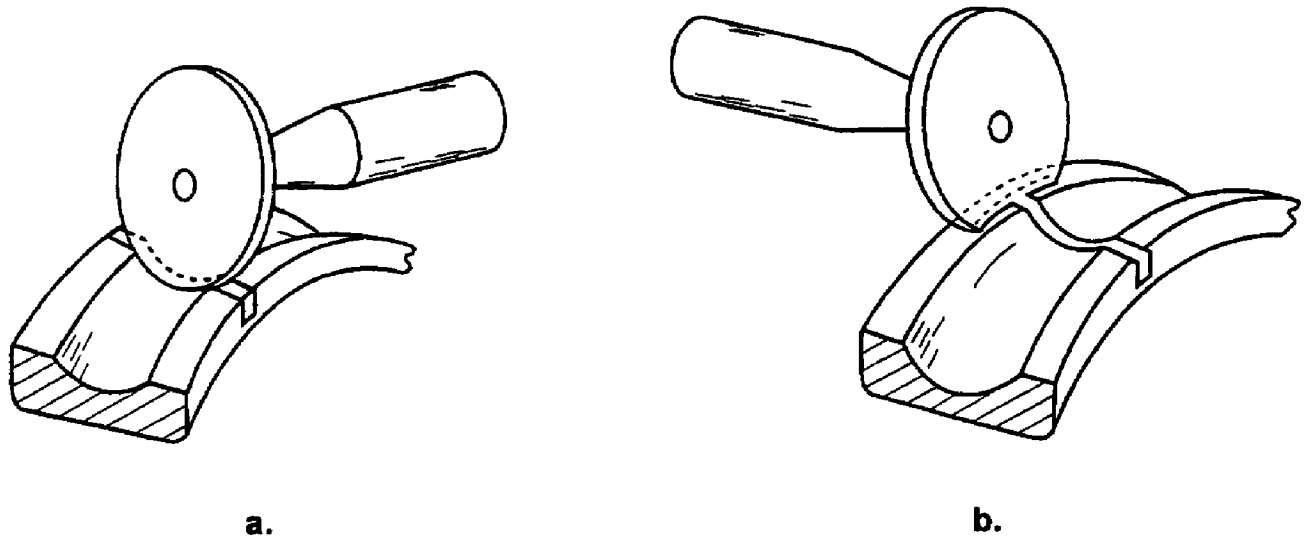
Cutting Inner Ring with High-Speed Grinder
